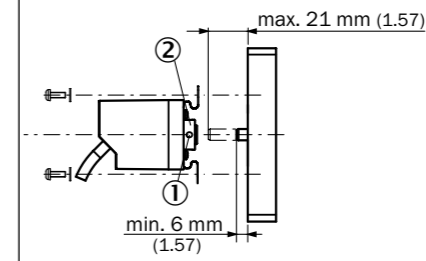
Installation DBS36 blind hollow shaft with stator coupling
